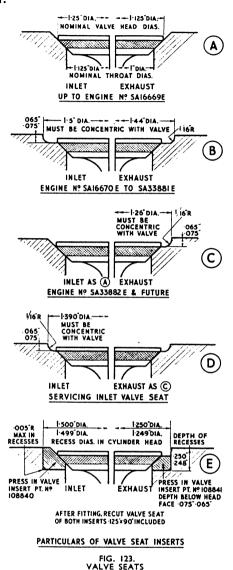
A shows the original form of both inlet and exhaust seats which were modified at Engine No. SA.16670E to those shown in Fig. 23B and subsequently changed at Engine No. SA.33882E to the forms shown Fig. 23C. It is recommended that engines prior to SA.16670E are modified similarly, if required, by means of the Hand Machining Equipment FT.6056, set to recess to the specified depth, with cutter FT.138 adjusted to the required diameter. See Fig. 124.
